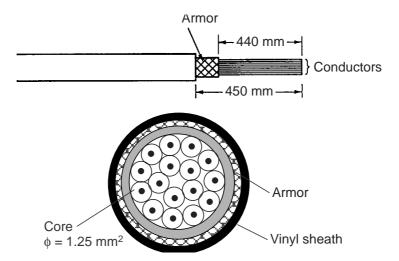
Fabrication of multicore cable 660V-MPYCY-12/250V-MPYCY-12
